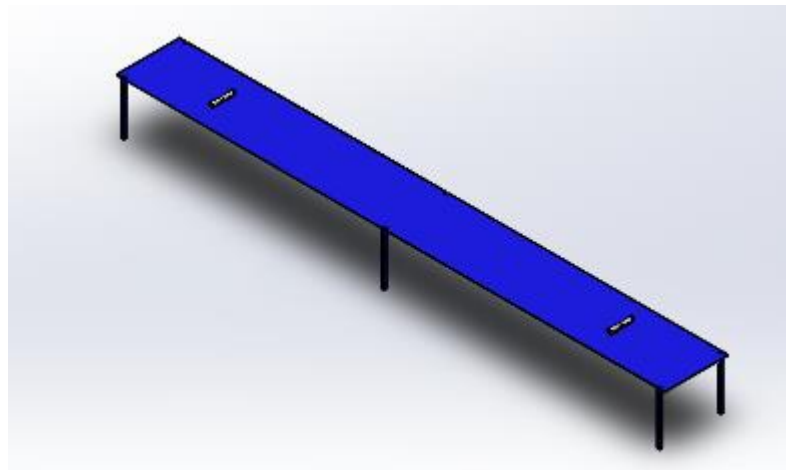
Assembly of frame support, roller support, roller, bolt and nut
